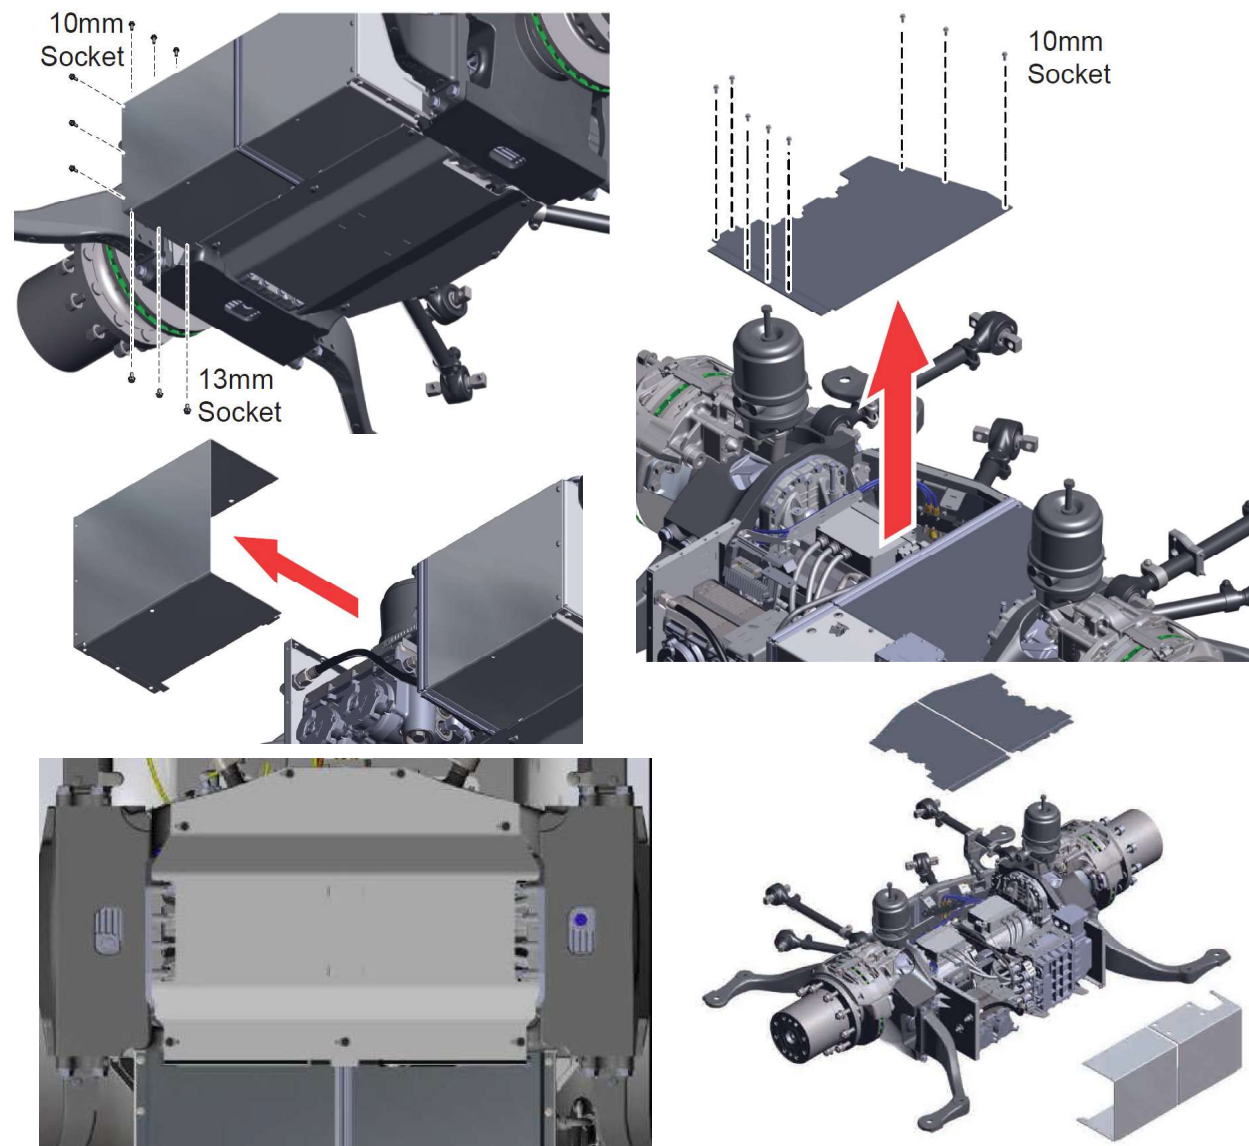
Remove DuoPower Axle Skid Plates and Cover Plates
